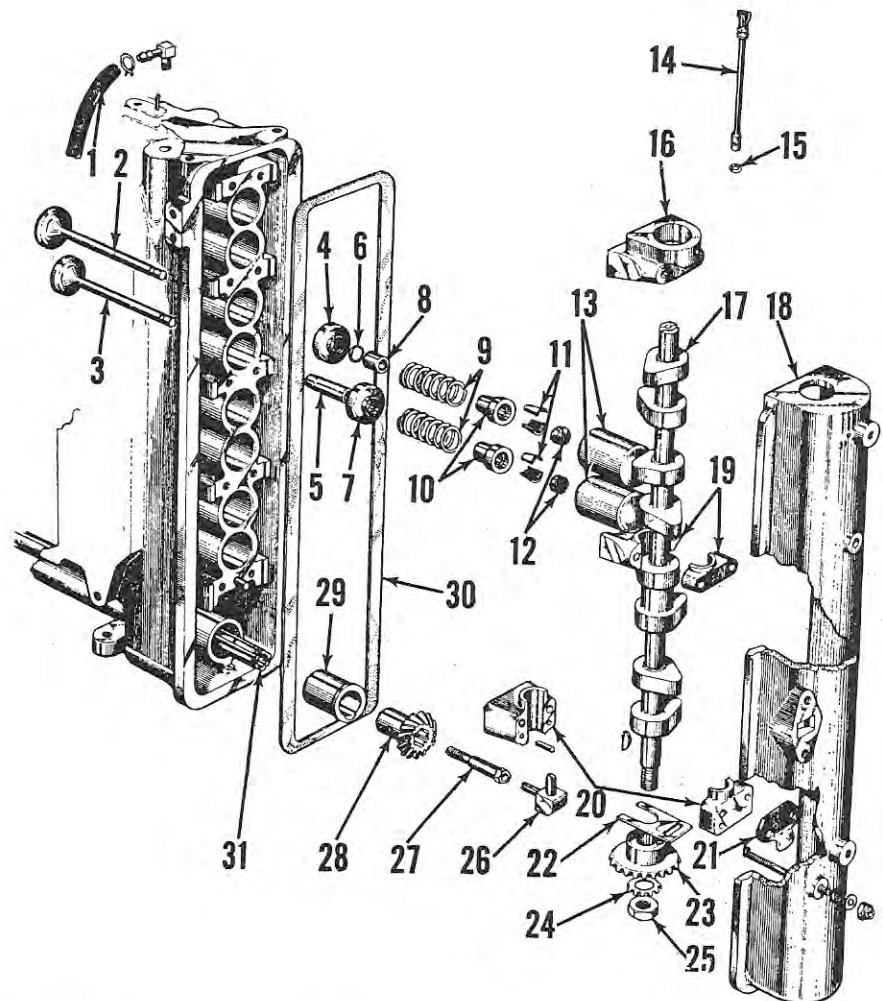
Exploded view of camshaft, valves and associated parts. An early model is shown. Tell-tale water line was moved to upper end of water jacket plate on manifold side of engine in late models.
